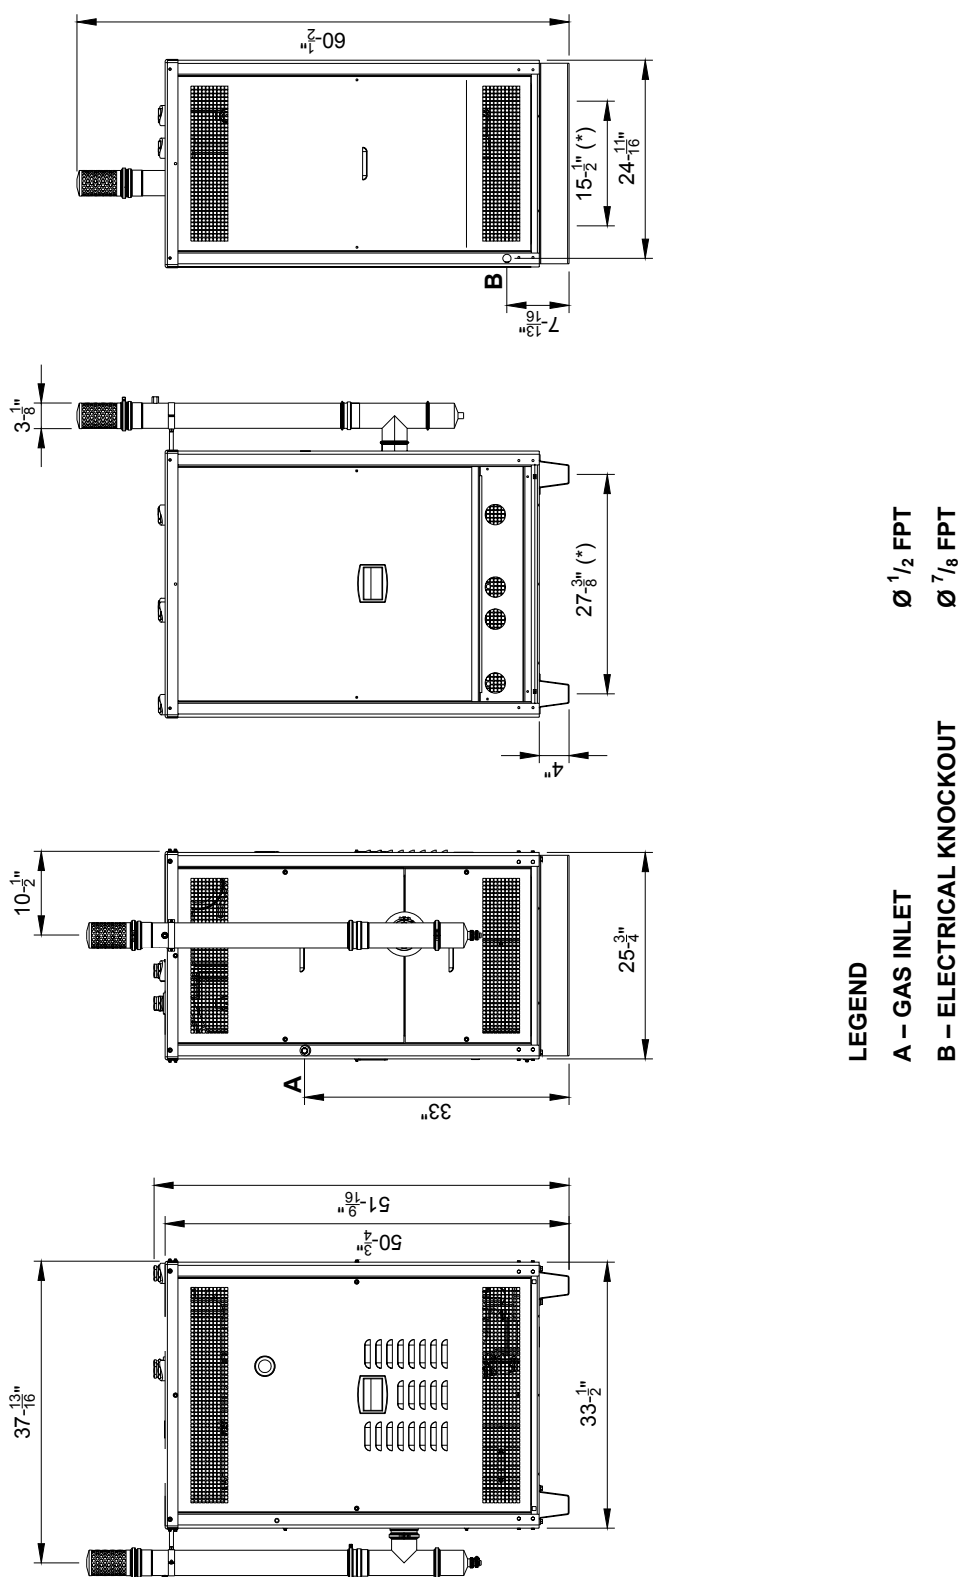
GAHP-W and GAHP-W LB external dimensions.
